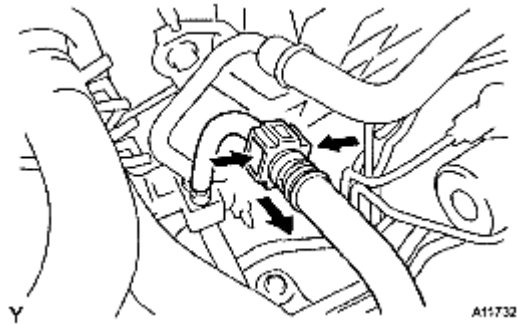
Pulling Fuel Tube Connector Out Of Pipe
